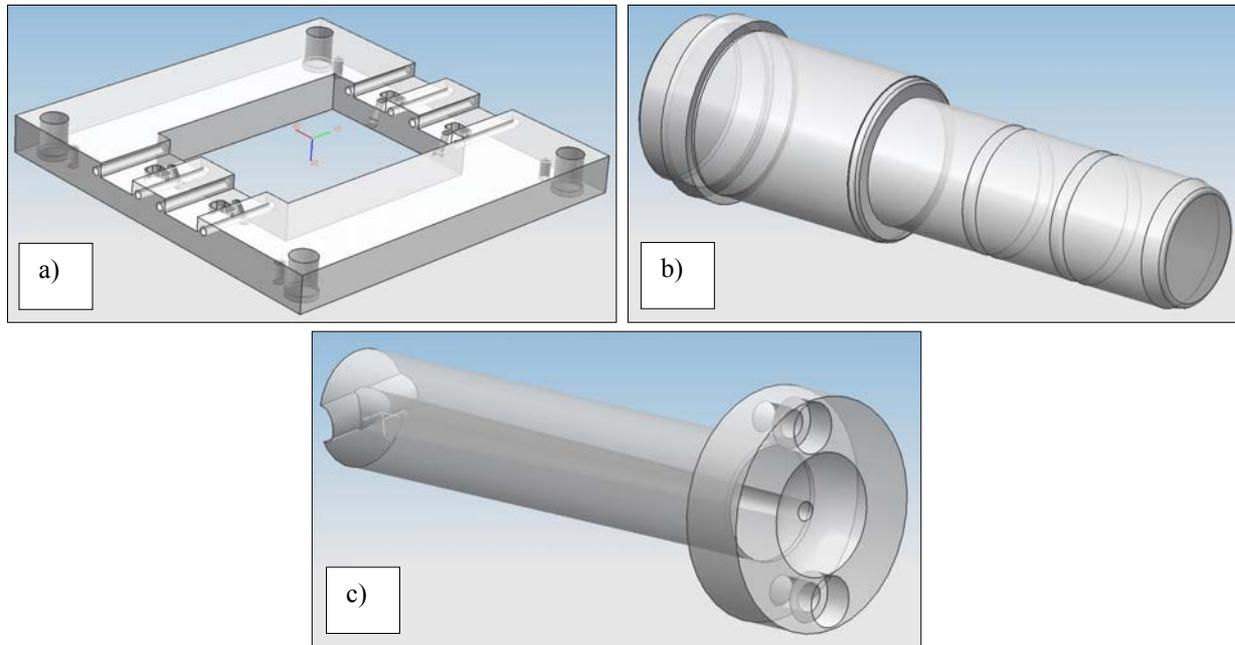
Chosen kinds of parts available to place into the assembly: a) plate, b) leader pin, c) sprue bushing
